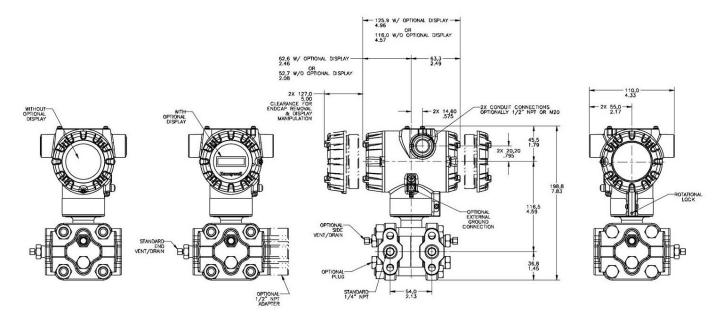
Typical mounting dimensions of STD810, STD820, STD830 & STD870 for reference
